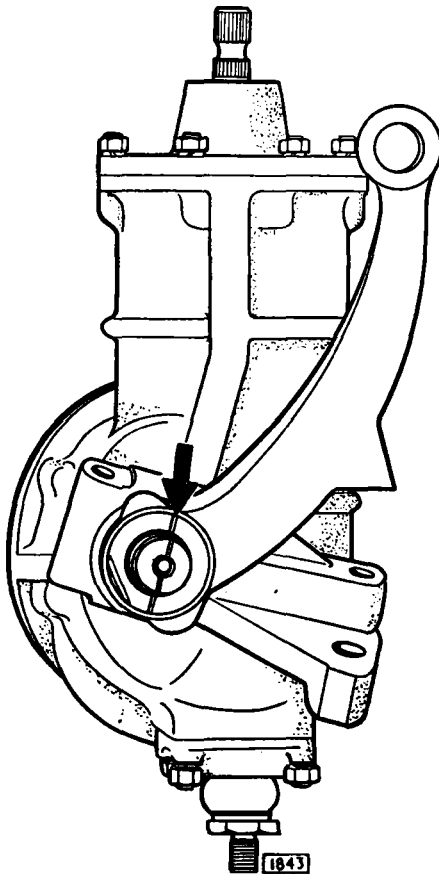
Showing the alignment of the drop arm/rocker shaft marks on the steering unit.
